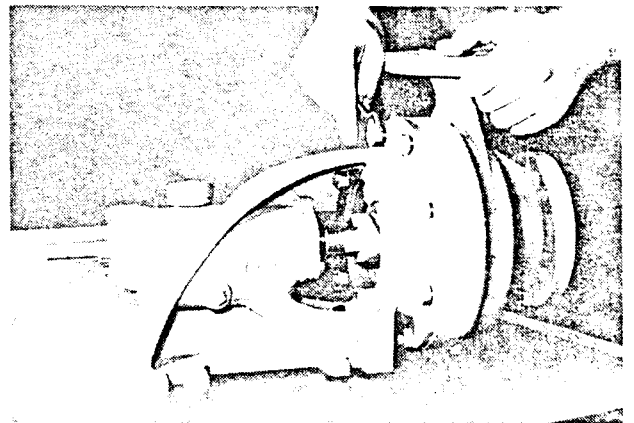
Undoing the bolts fastening the volute casing to the discharge cover
